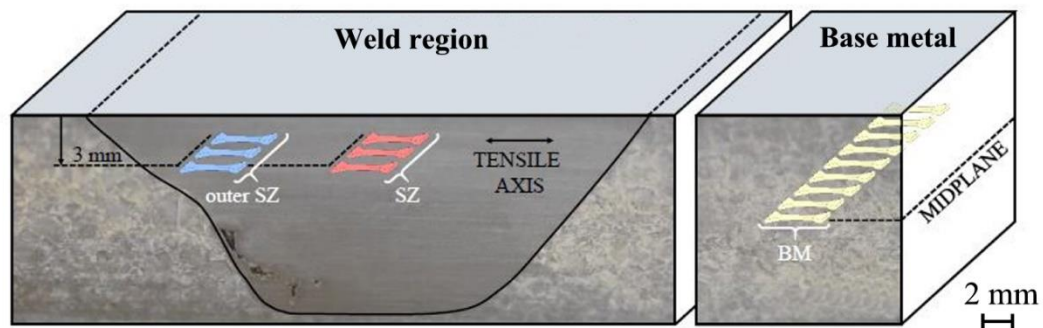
Schematic representation of the weld region and base metal of friction stir welding (FSW) and the location of the extracted microsamples (Nimer 2016).
